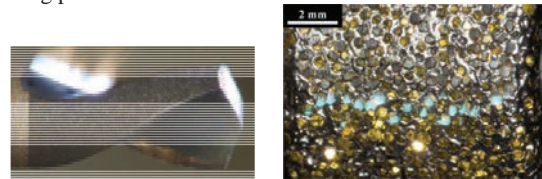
Laser-manufacturing of the PCD drill (left), Laser-manufacturing of a diamond dressing tool right.
